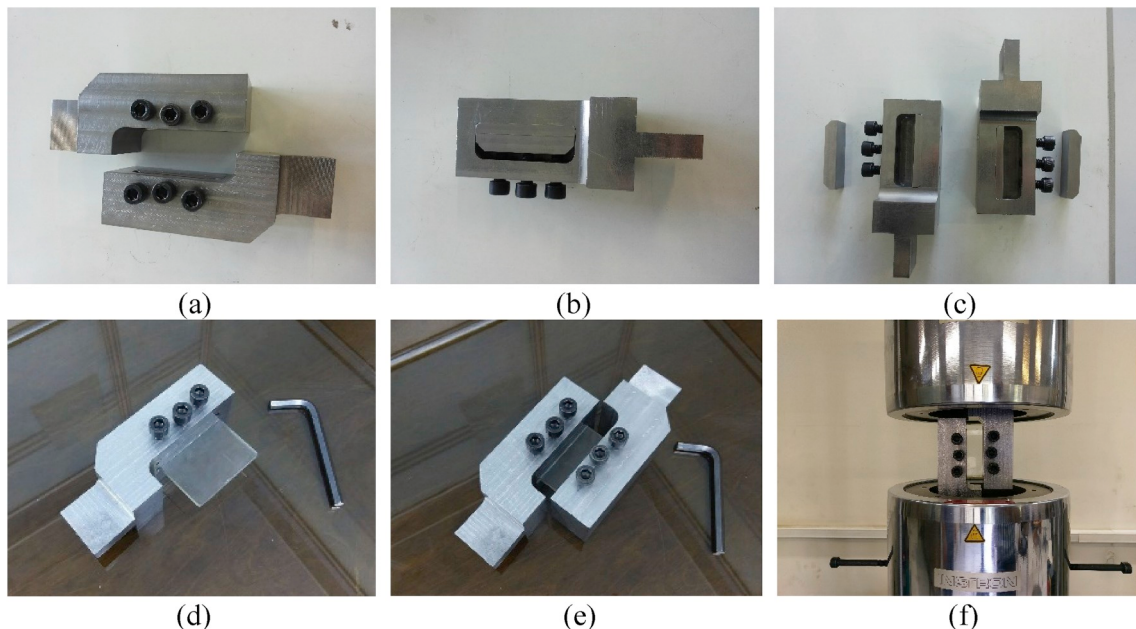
(a)–(e) Fixtures newly designed for shear deformation tests, (f) fixtures in tension machine.
